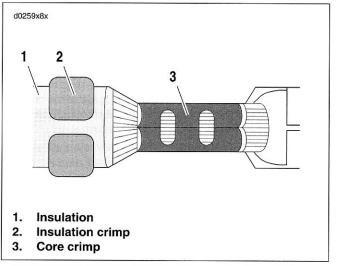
Inspect Core and Insulation/Seal Crimps
